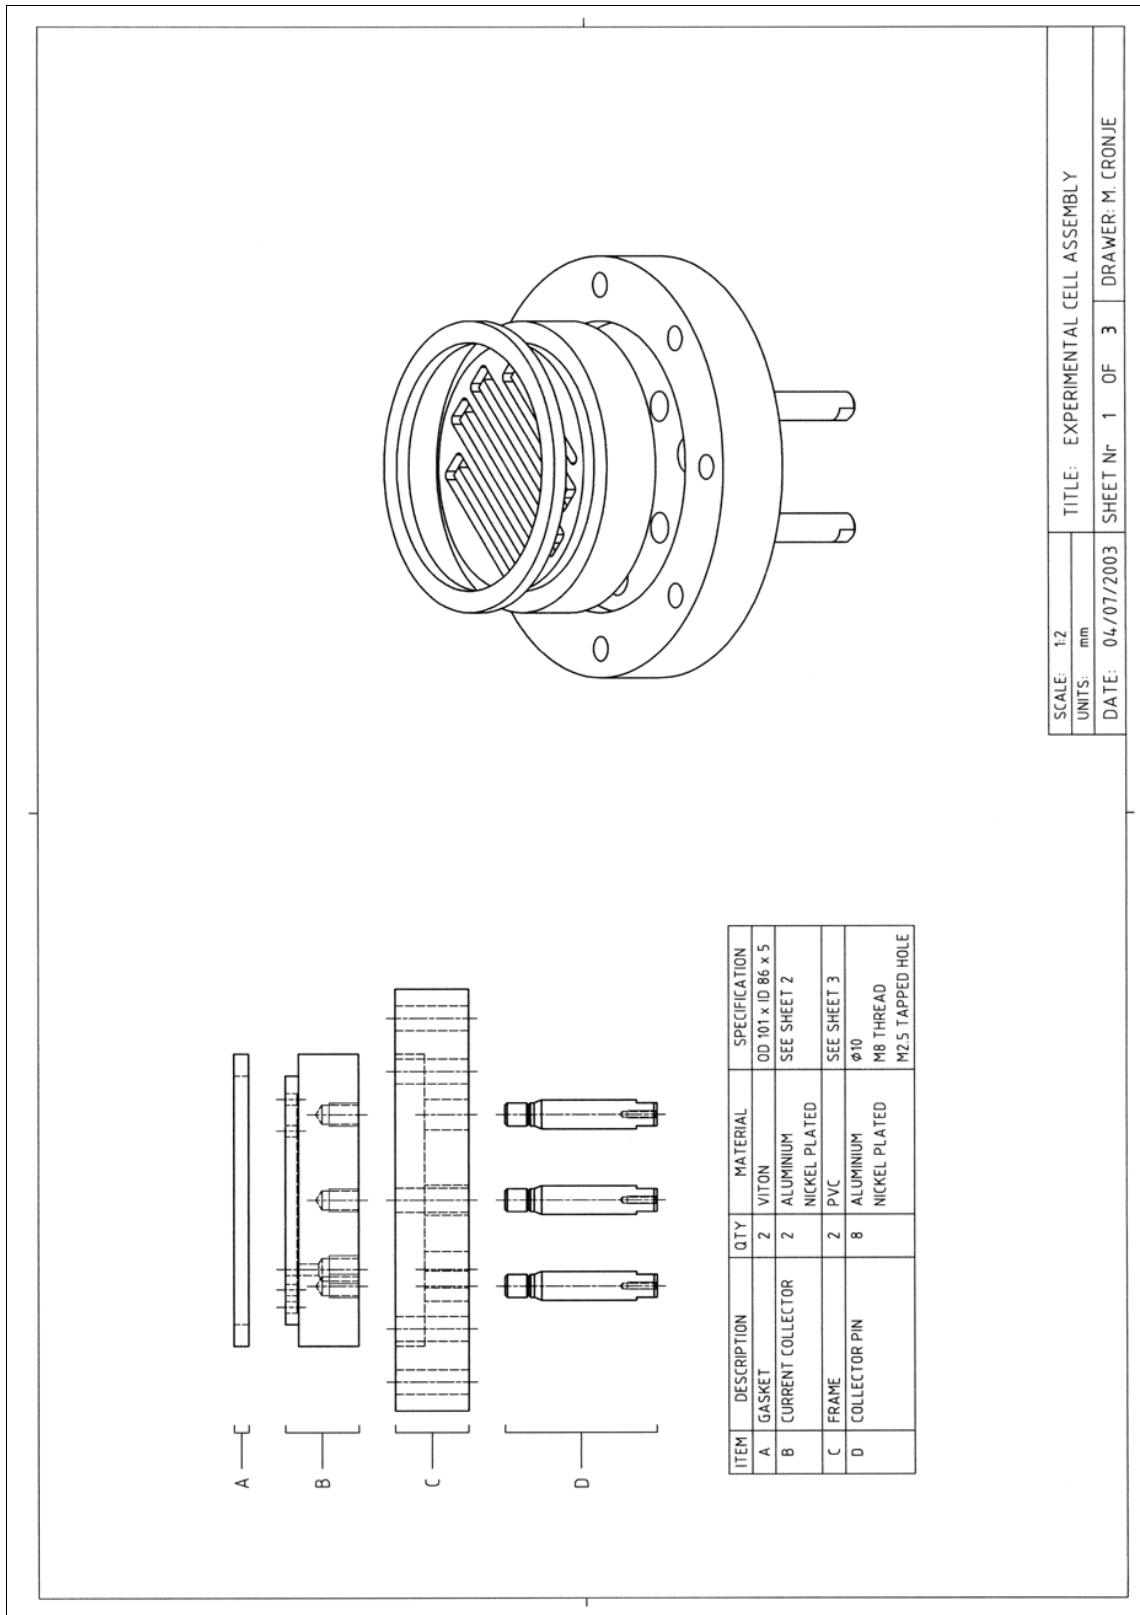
Technical drawing showing all parts of the laboratory reactor
